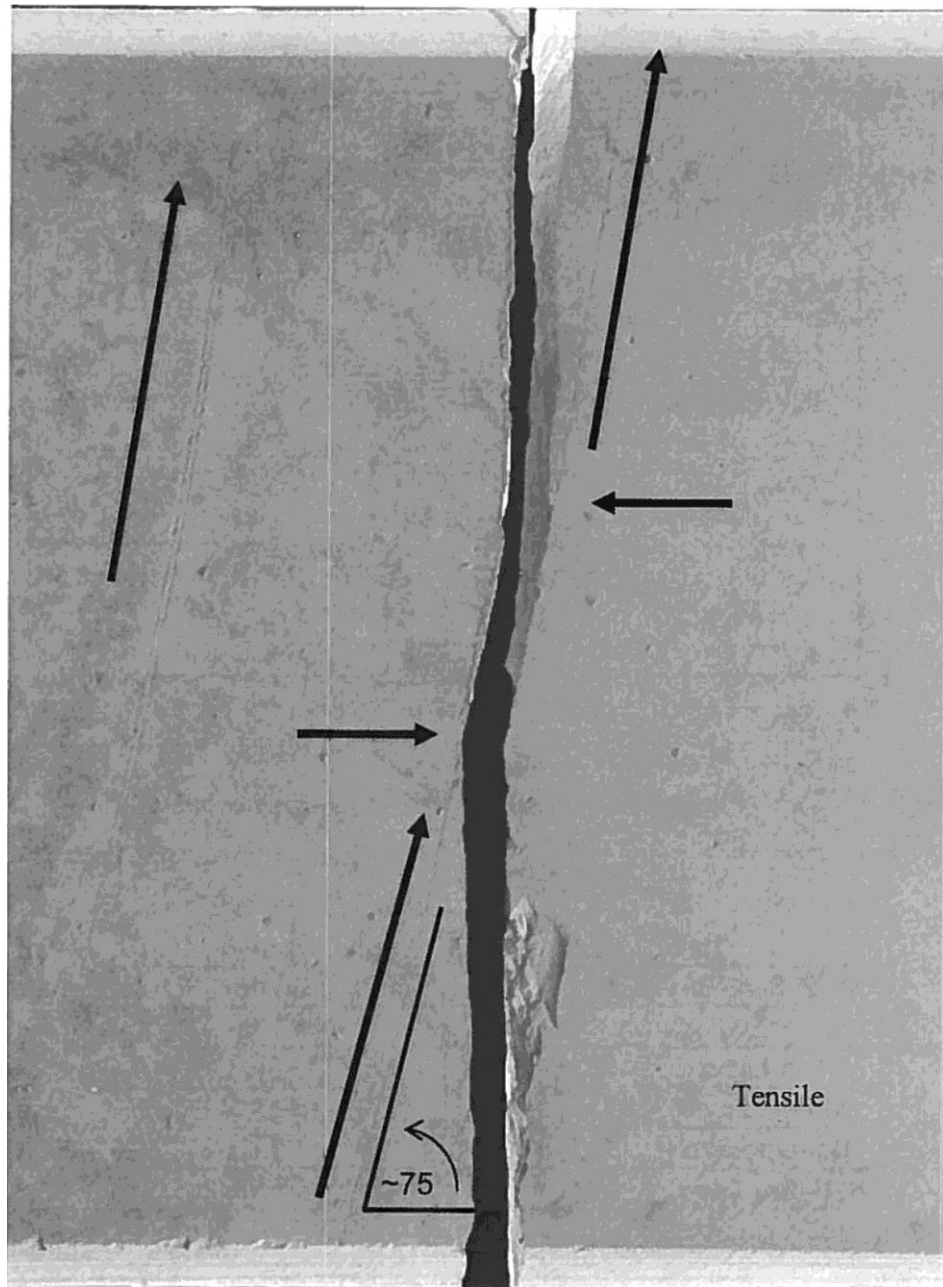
Errant machining scratch; tensile surface of low-strength bend bar (A)
